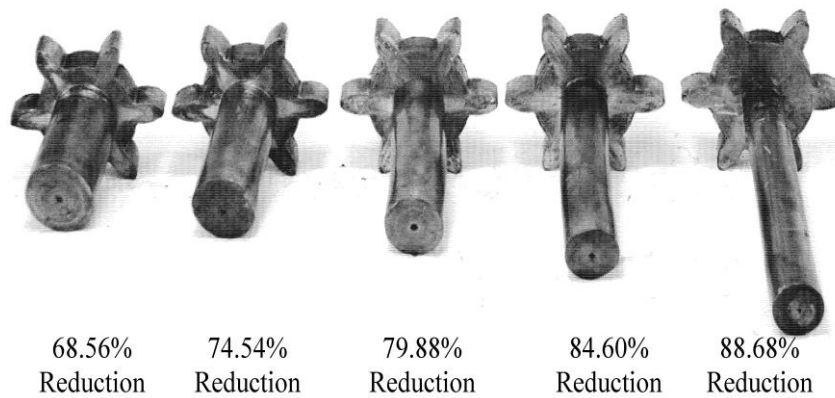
Extruded forward extrusion-forging 6-tooth gear head shaped product
